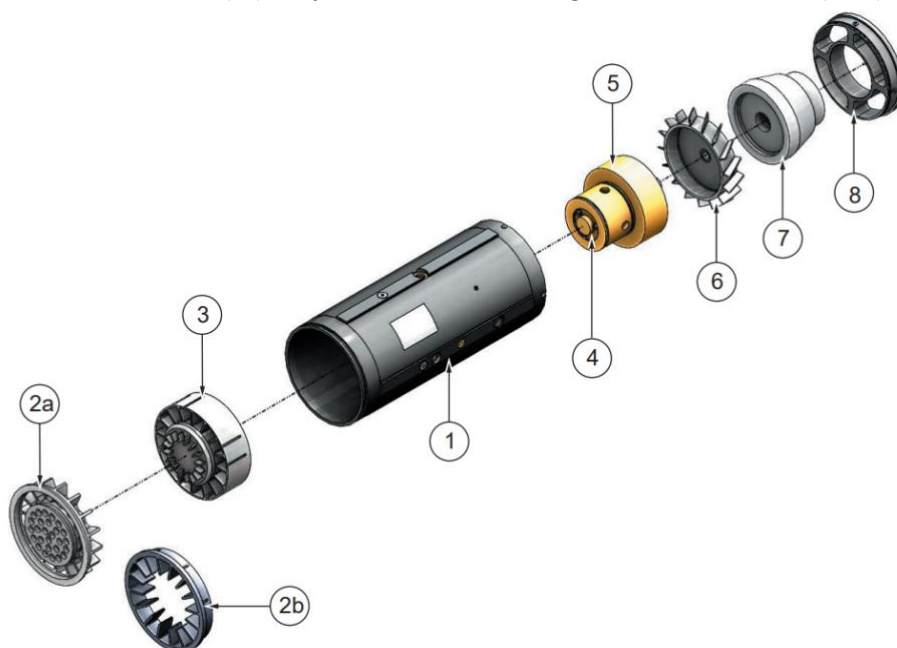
3D Exploded drawing of a measuring cartridge in the iM-TM model produced by Pietro Fiorentini for NG or H2NG mixtures up to 20%vol. (1) Measuring chamber; (2) First rectifier– a) type 1, b) type 2; (3) Second rectifier; (4) Magnet for high frequency; (5) Bearing housing; (6) Turbine wheel; (7) Pressure compensation ring; (8) Third rectifier. Image from Pietro Fiorentini (2023) [13].
